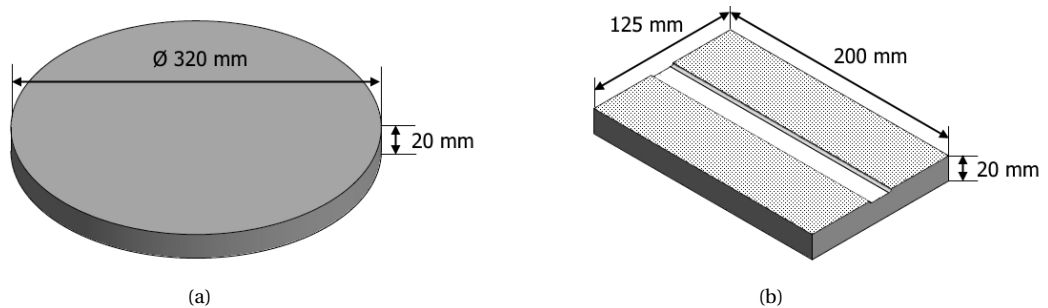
Schematic view of the 18CrNiMo7-6 substrates with the corresponding dimensions. (a) substrate for large depositions and (b) carburized substrate with a milled groove for smaller tests.
